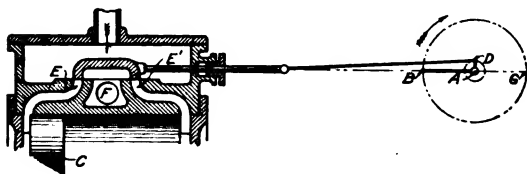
Elementary Slide Valve—Valve in Mid-Position
